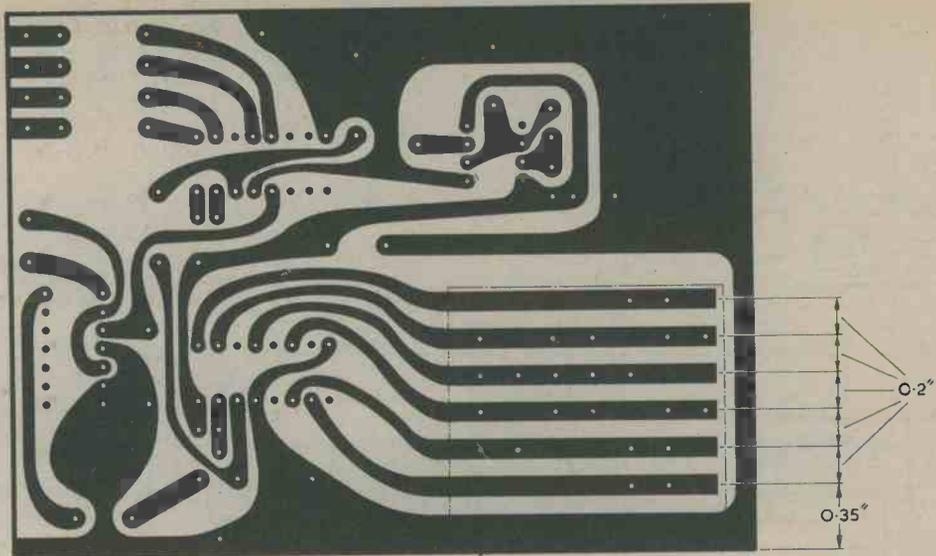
(a). The copper side of the printed circuit board. This is reproduced full size
